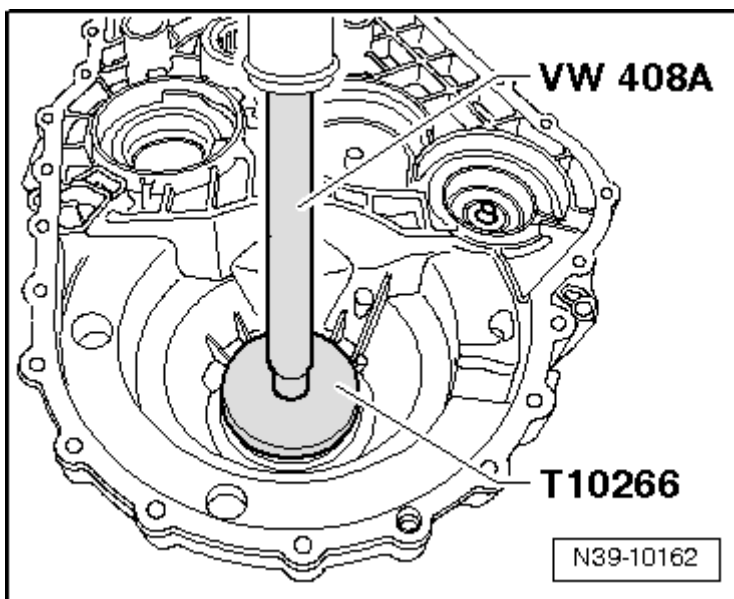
Installing Outer Race/Tapered Roller Bearing Into Clutch Housing
